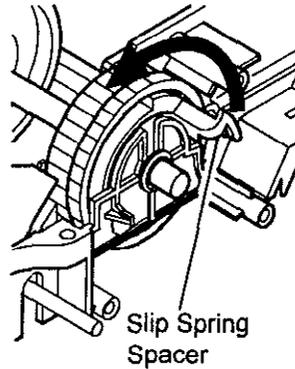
Rotate Paper Feed Roller and Slip Ring Spacer
